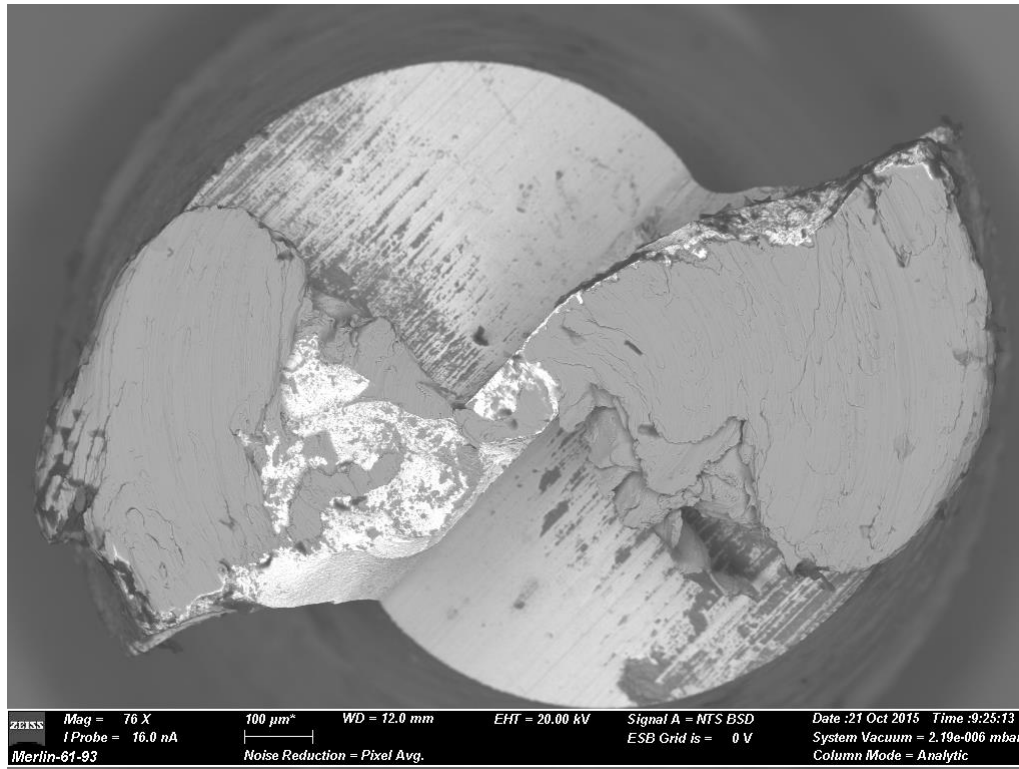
Experimental run 11: Tungsten carbide tool after machining with parameters $v_c=70.69$ [m/min], $v_f=612.97$ [mm/min] and $a_p=143.58$ [μm]
